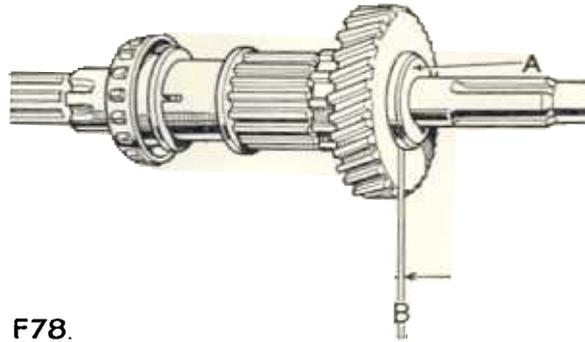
Checking end-float of the 'low' transfer gear wheel
